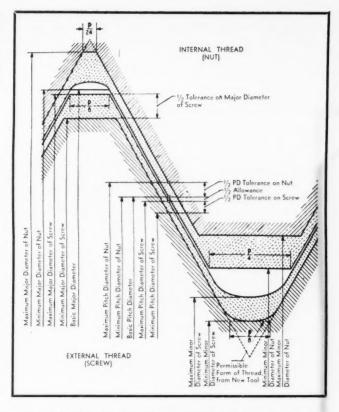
Drawing shows Class 2A, and 2B tolerances, allowance, and crest clearances. These classes are the recognized standards for the normal production of bolts, screws and nuts. (Drawing not to scale.)
